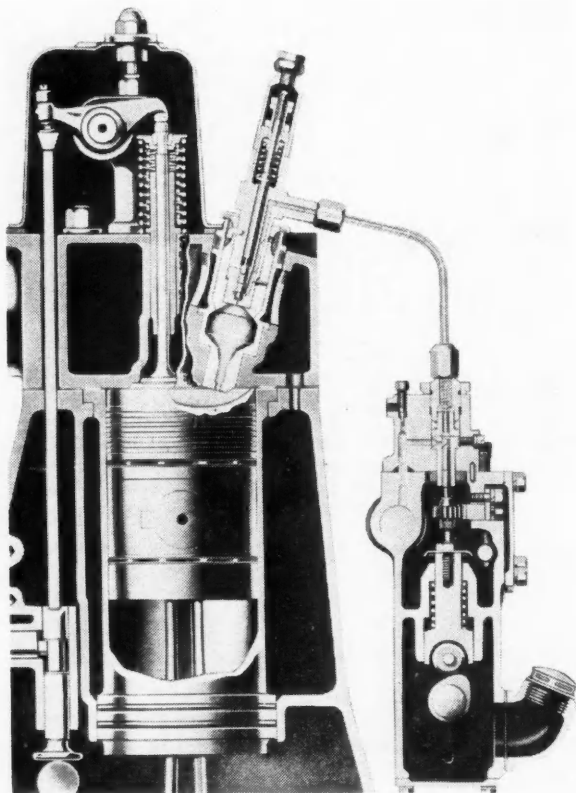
Cross-sectional view of $4\frac{1}{4}$ by $5\frac{1}{2}$ -in. Caterpillar Diesel engine showing arrangement of pre-combustion chamber and shape of clearance volumes.
